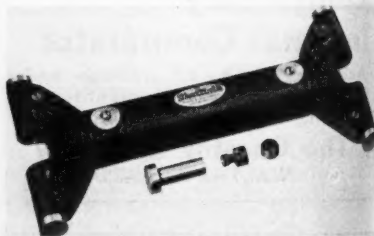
Sheffield Adjustable Plug Gage for sizes over 4 inches.
